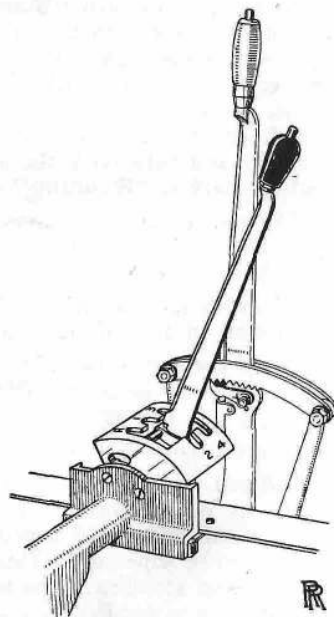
PERSPECTIVE VIEW OF GEAR LEVER GATE.
